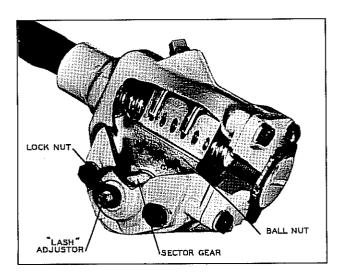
Steering Gear Lash Adjustment (Sector Gear)
